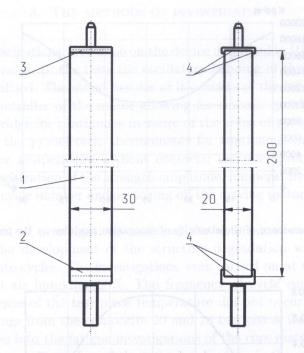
The shape and dimensions of the test piece for fatigue investigations; 1 – polyvinyl chloride foam, 2 – lower holder, 3 – upper holder, 4 – adhesive layer.
